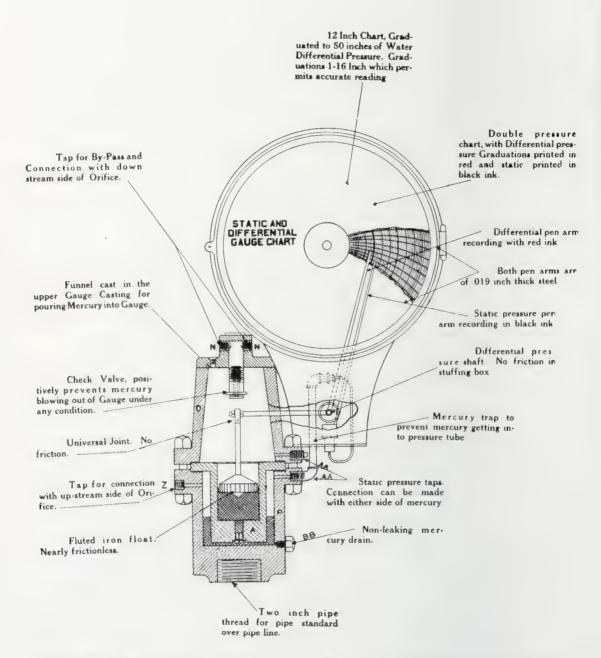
SECTIONAL VIEW OF A 50 INCH DIFFERENTIAL GAUGE CONCENTRIC CHAMBERS
